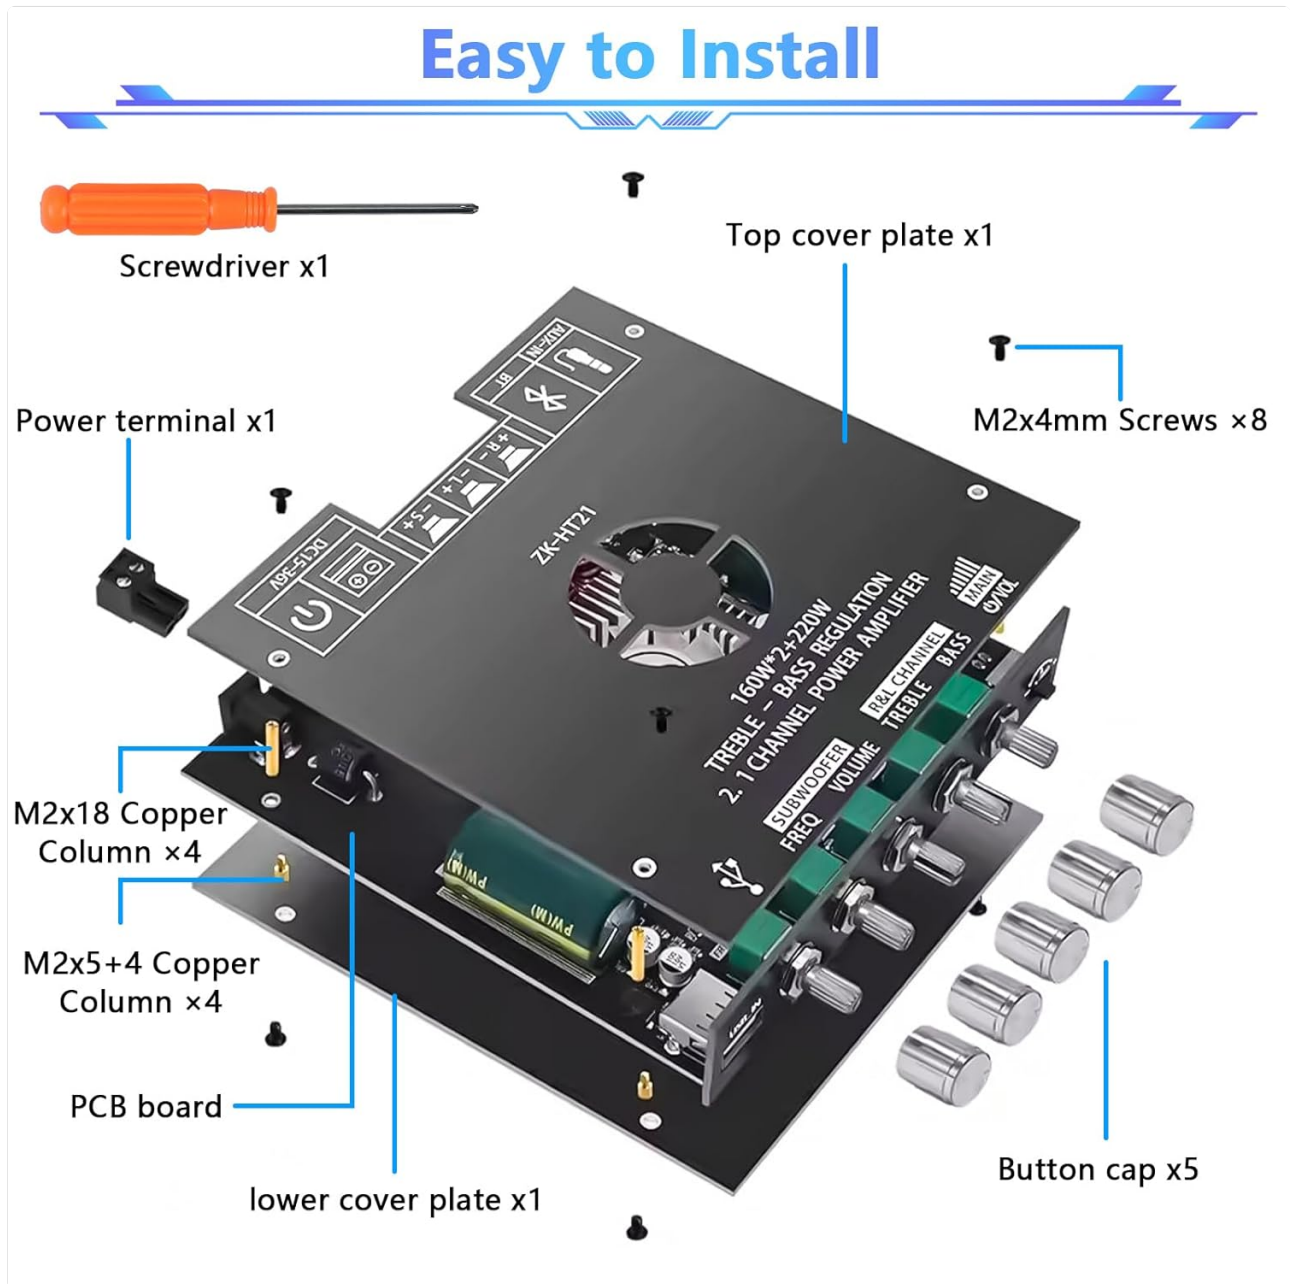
Assembly Diagram. This image illustrates the assembly process, showing the PCB board, copper columns, top and bottom cover plates, screws, and button caps.
